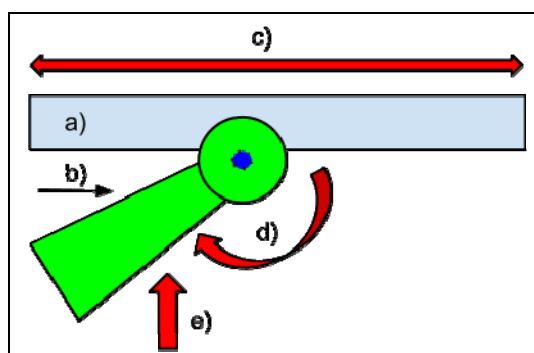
Kinematic diagram of the test stand – top view: a) machined test sample, b) high-speed handpiece, c) feed direction of the sample, d) rotation direction of the spindle, e) force between tool and sample
